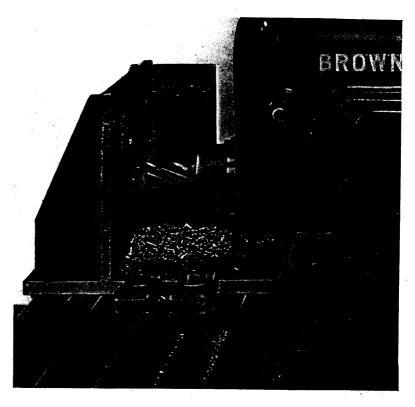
Milling a form using a gang of three interlocking cutters. Note how the set-back face of the machine column allows the cutters to be mounted close to the spindle nose of the machine. Since arbor deflection (caused by the pressure of the cutters on the work) decreases rapidly as the cutters are brought closer to the spindle nose, the cutters should always be located as close to the spindle as possible in order to secure maximum cutter rigidity.
